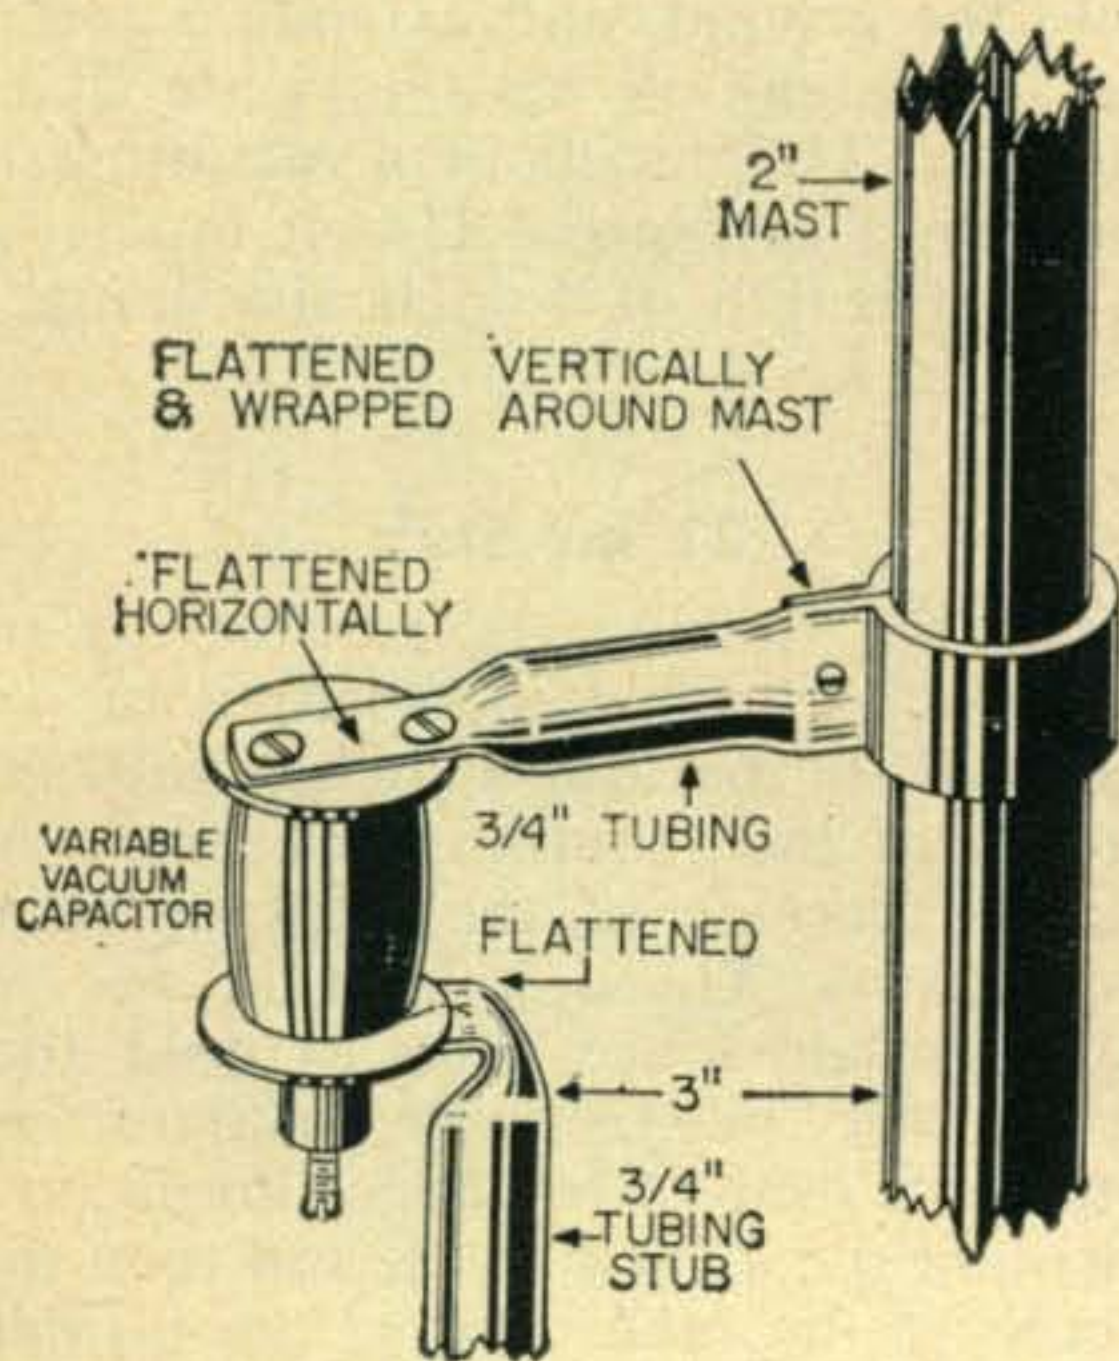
Detail view of the Gamma match vacuum variable mounting.
